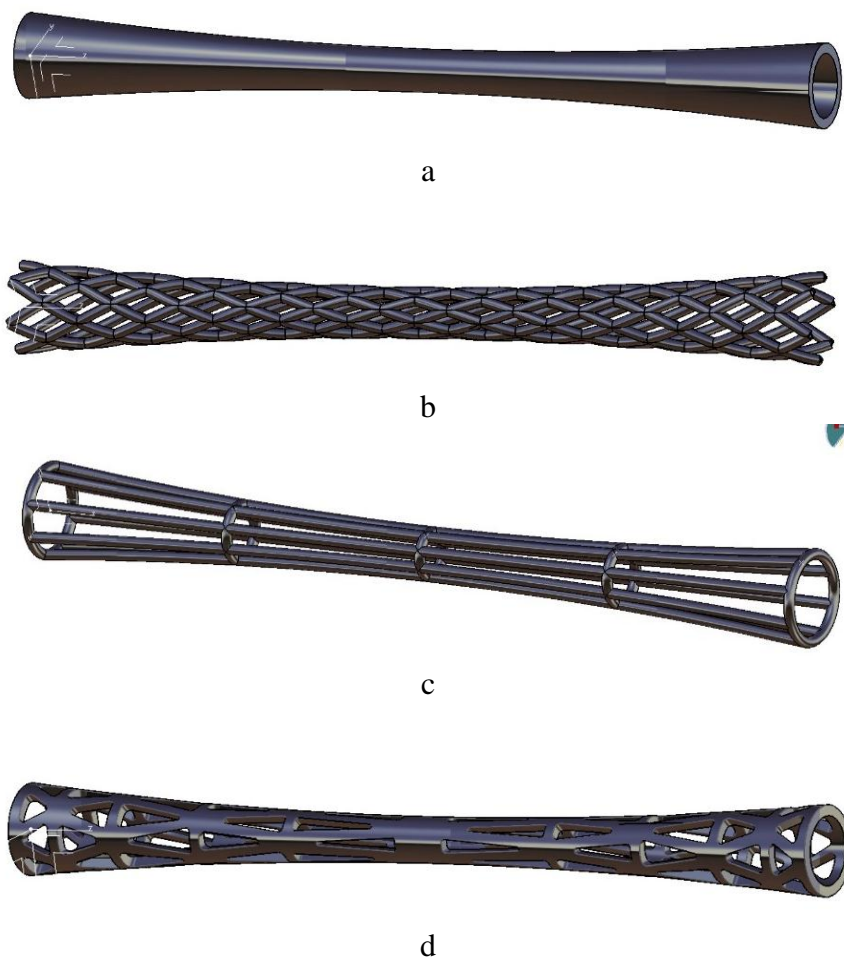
Constructive variants of the connecting element: a- solid structure; b - fiber structure; c - longitudinal reticular structure; d - box structure.
